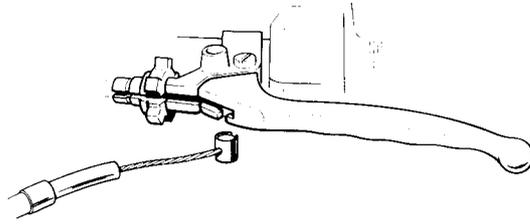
Removal of the Clutch Cable at the Handlebar.
